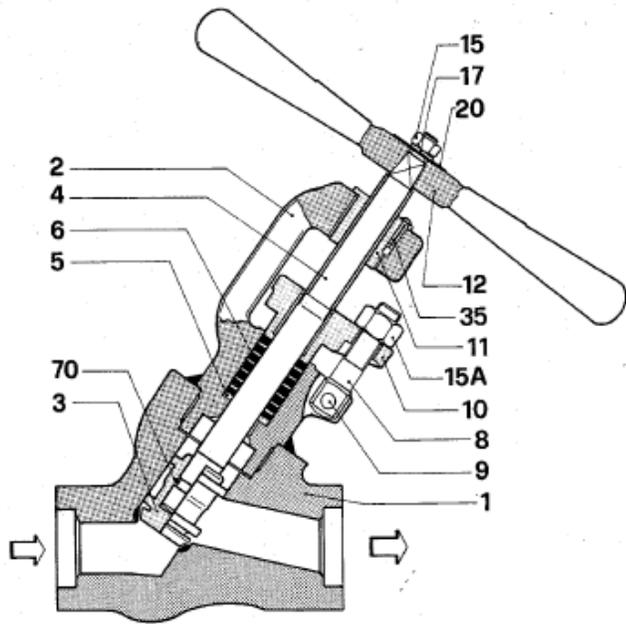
1 inch welded bonnet forged steel valve, ASME class 2700 lbs
